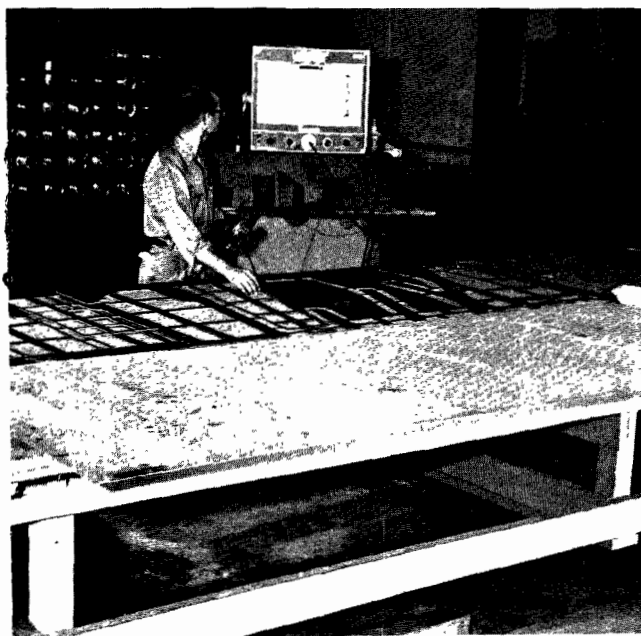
Inspection of milled parts. The instrument measures the metal thickness before the masking is removed (U.S. Chemical Milling Corporation, Manhattan Beach, Calif.).
